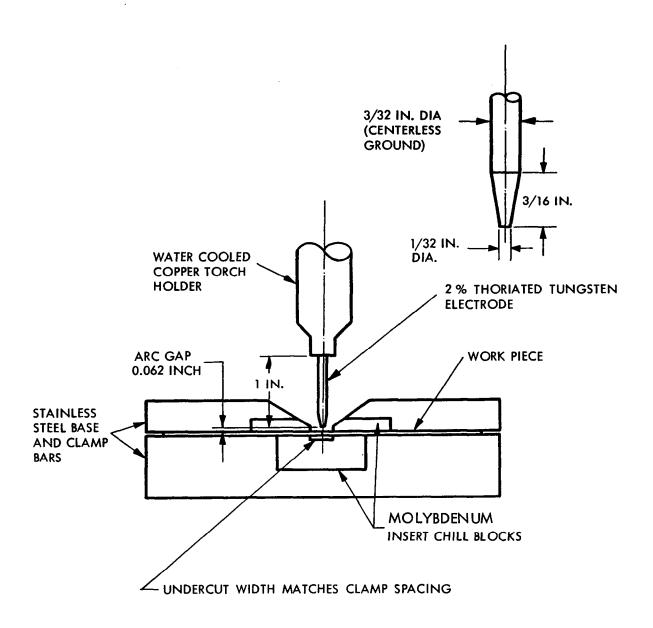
Weld Set-Up for GTA Sheet Butt Welds
